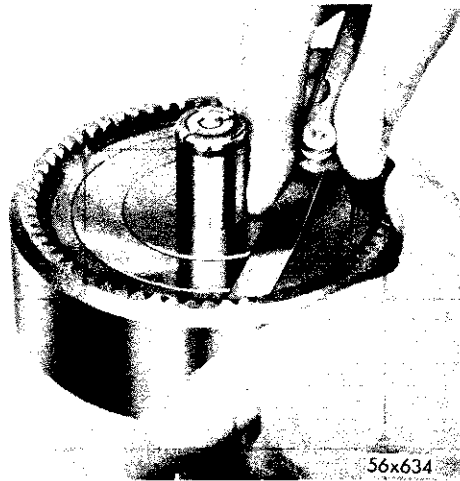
Checking Clearance between Kickdown Annulus Gear Snap Ring and Intermediate Shaft Assembly
